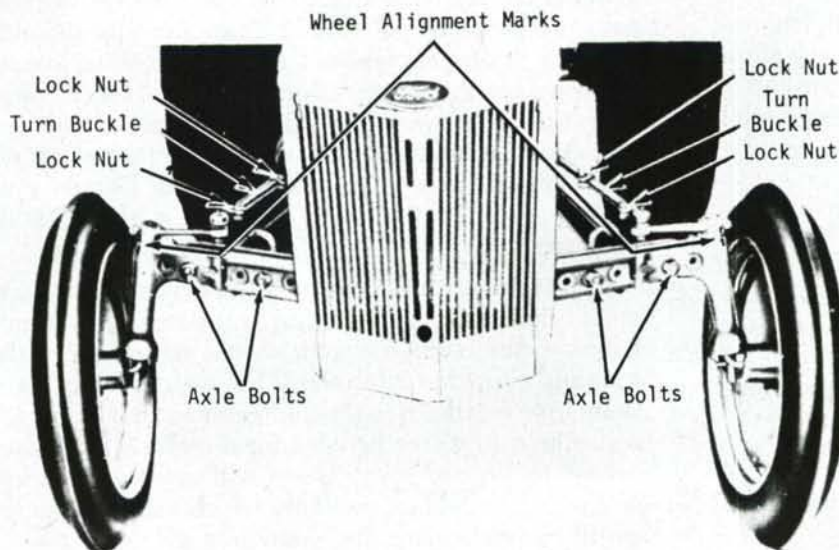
Front axle as used on 8N tractors. Note hole spacing of tread adjusting bolts.
